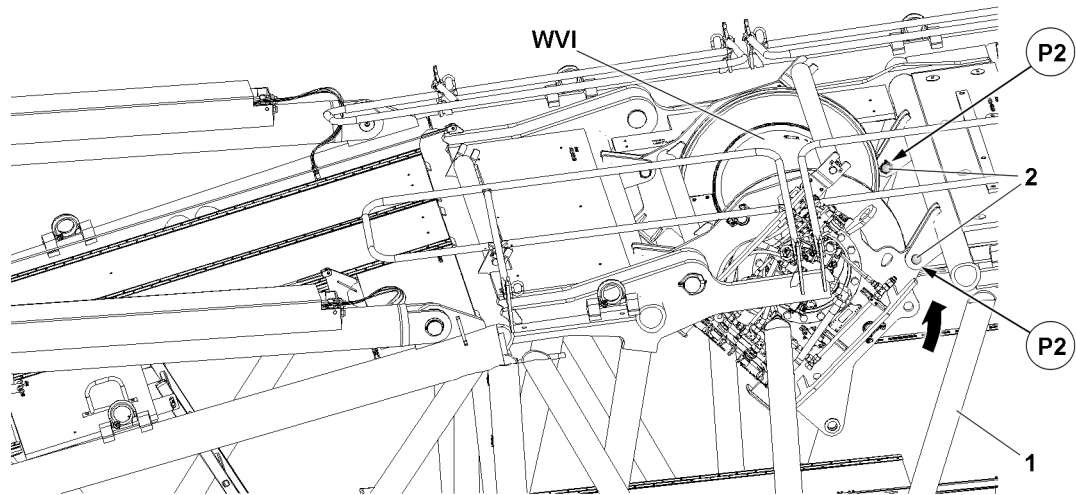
Fastening winch 6 WVI to the auxiliary crane and unpinning
